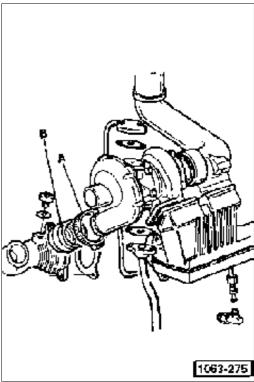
Manifolds-to-turbocharger connecting couplings.
